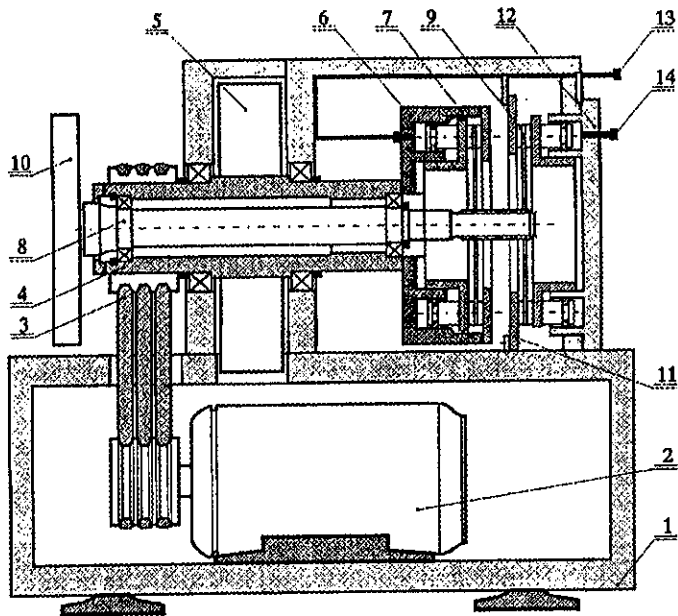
Oil immersed brake and clutch dynamometer PSS-51
